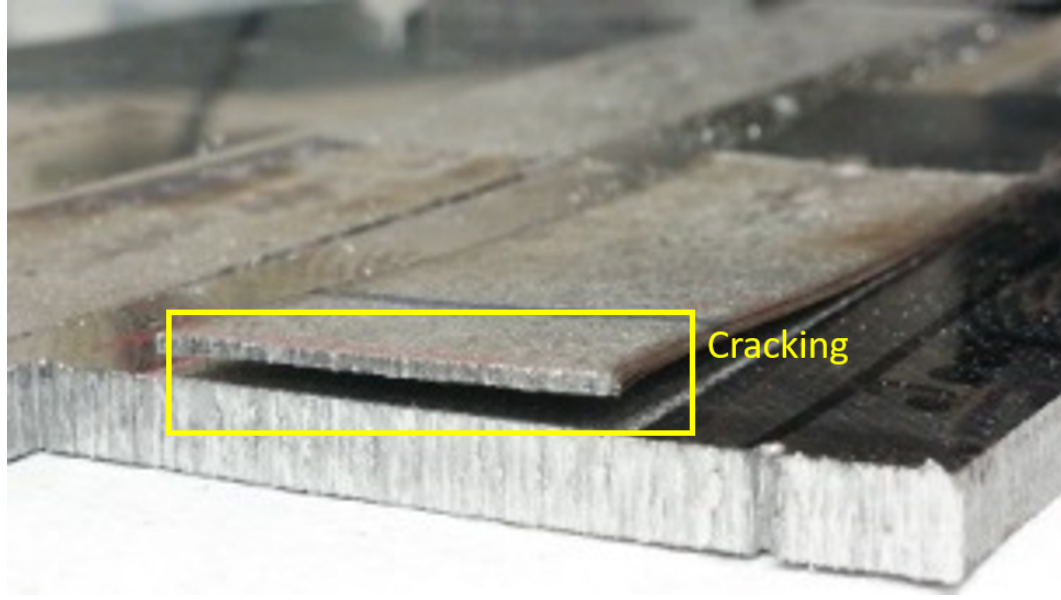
Image of cracking that occurred during UAM steel welding.
